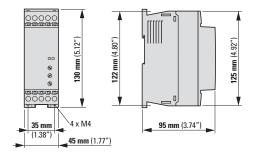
Dimension drawing DS7 without SWD – Size 1 (up to 12 A)
